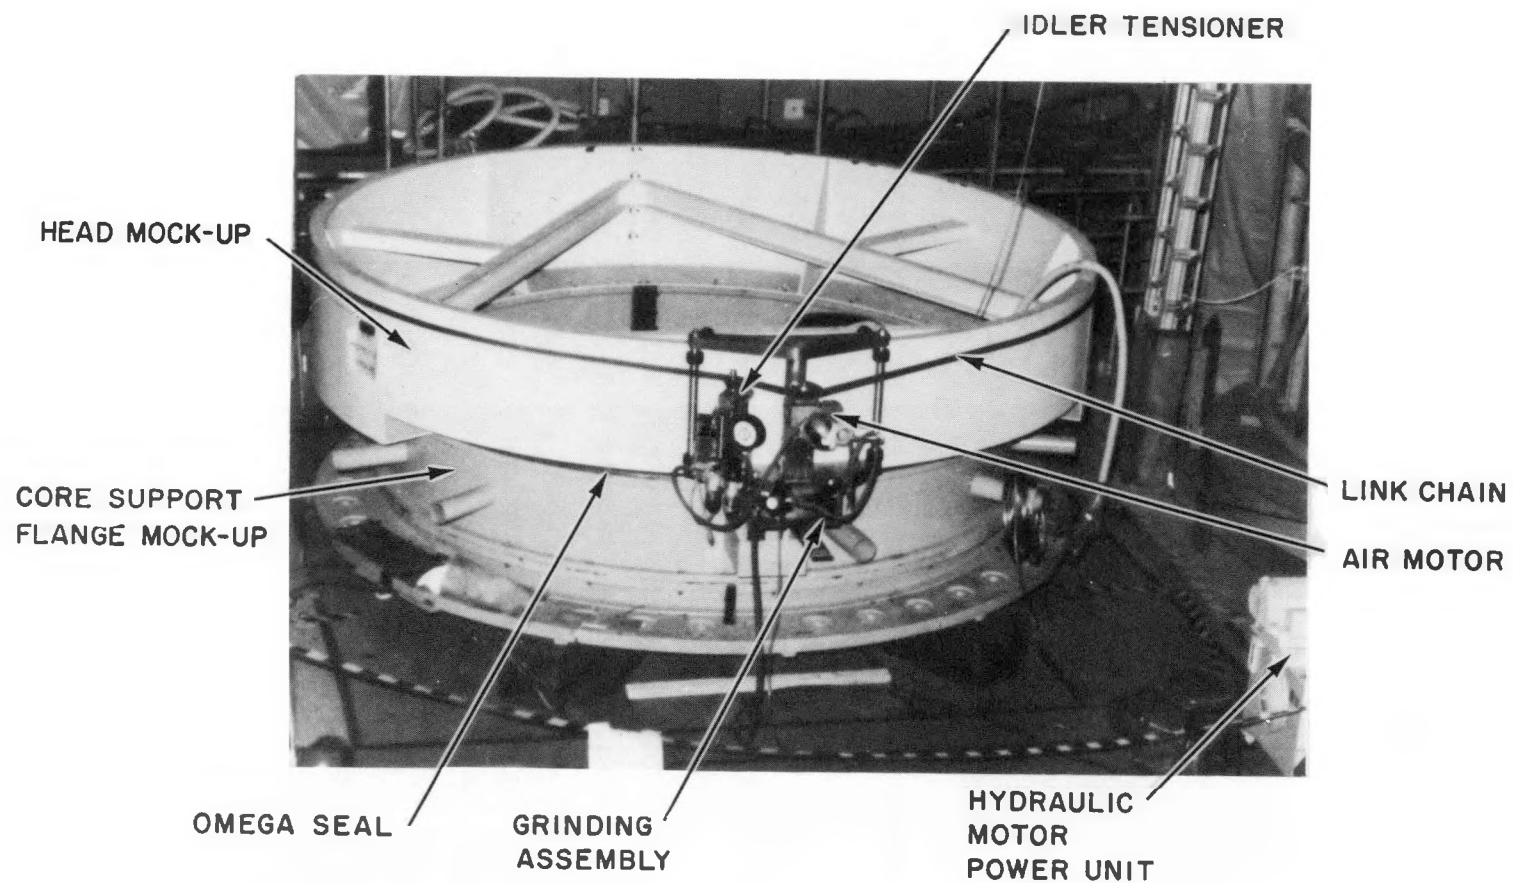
Closure Head Grinding Machine Attached to Mock-up During Checkout
